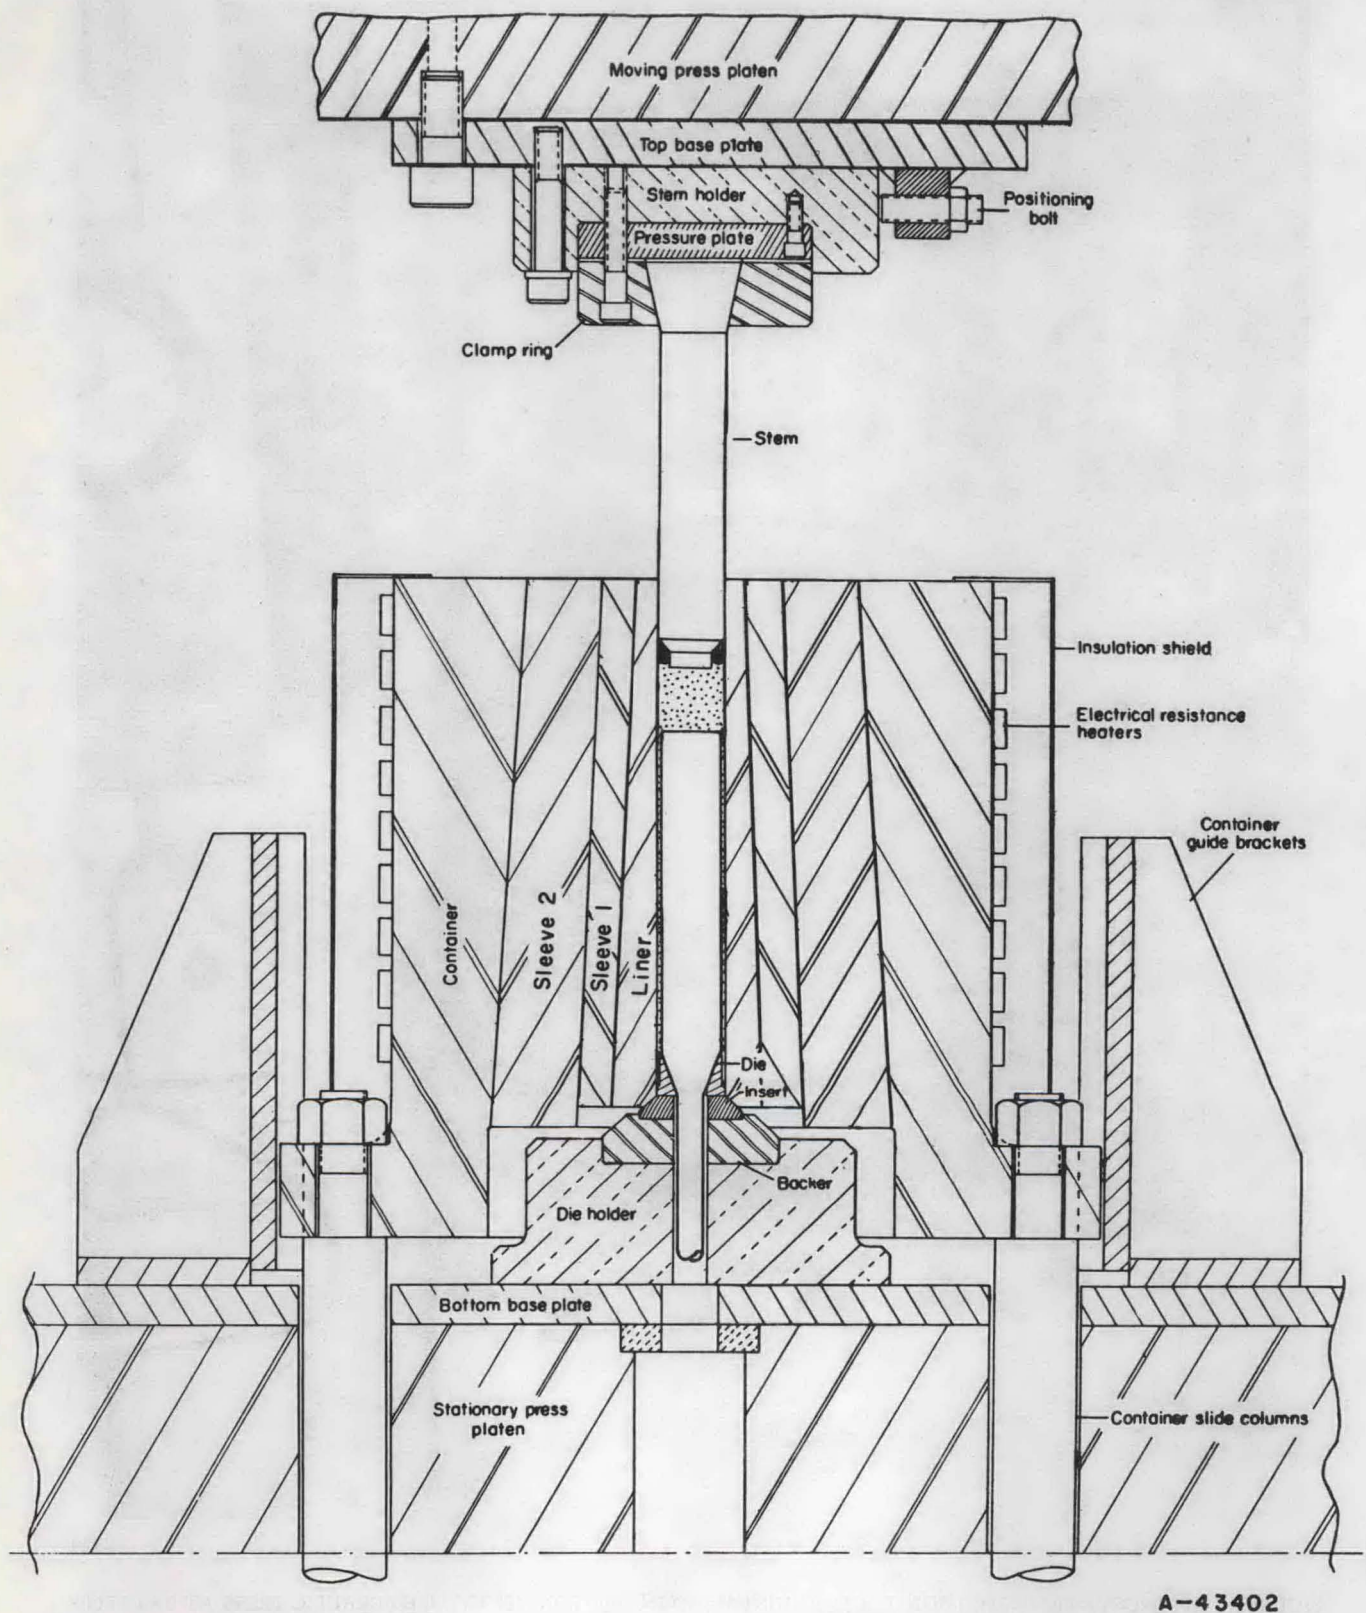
ASSEMBLY DRAWING OF TOOLING FOR HYDROSTATIC EXTRUSION
